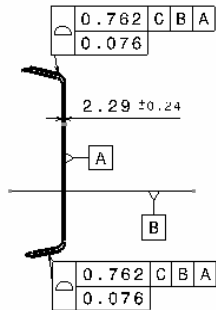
Tolerances applied to spar (datum C is the plane of the drawing)
